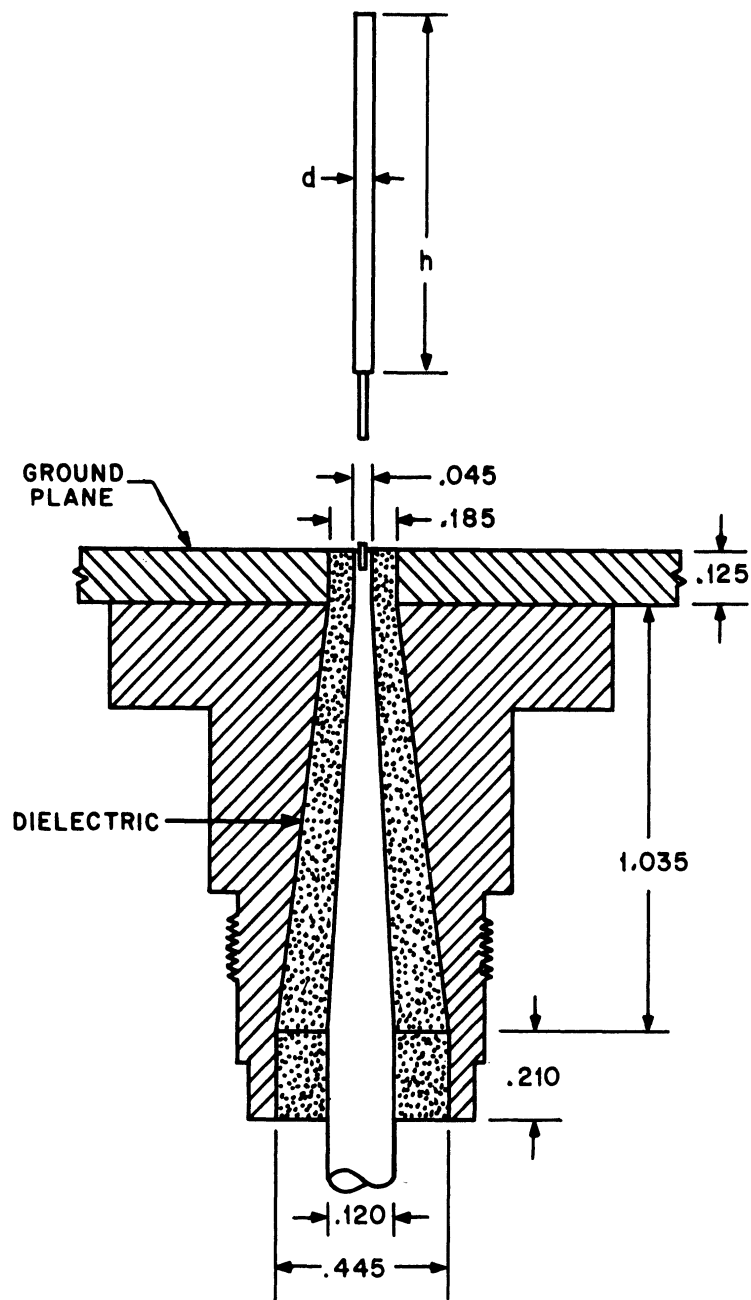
MONOPOLE MOUNT (Dimensions in Inches).
